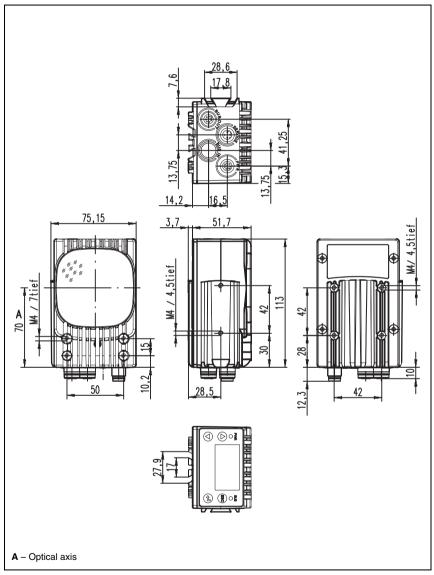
Dimensioned drawing of the LSIS 4xxi smart camera - standard devices
